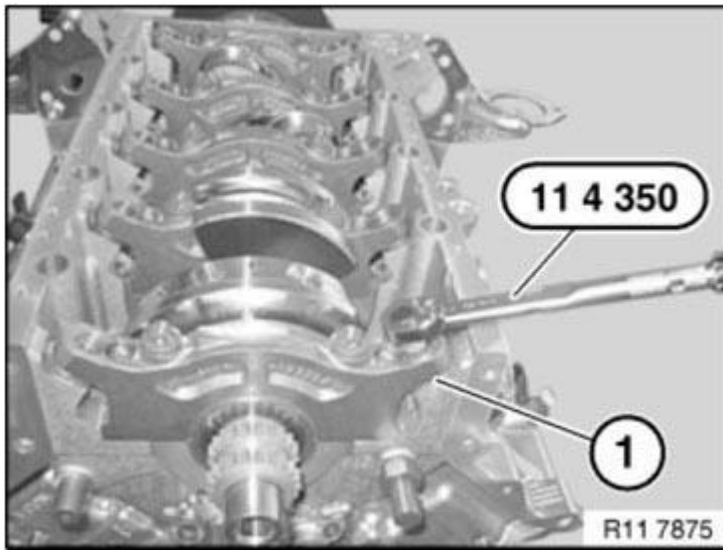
Securing All Threaded Support Sleeves With Special Tool 11 4 350
